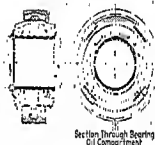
Large Turbine Bearing (Westinghouse). Self-aligning, with Additional Path for Cooling Oil in the Shell.
